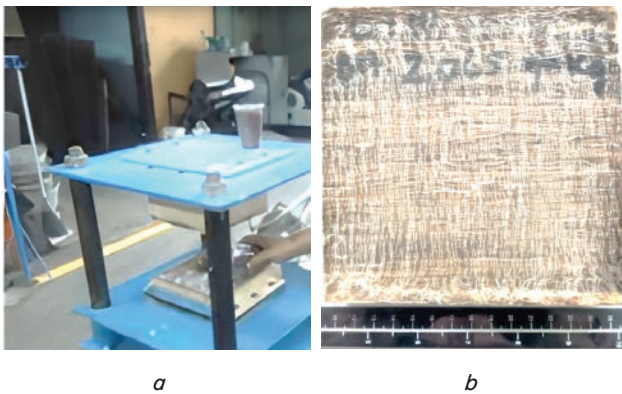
The process of molding the composites: *a* – hydraulic press machine; *b* – ramie composites
